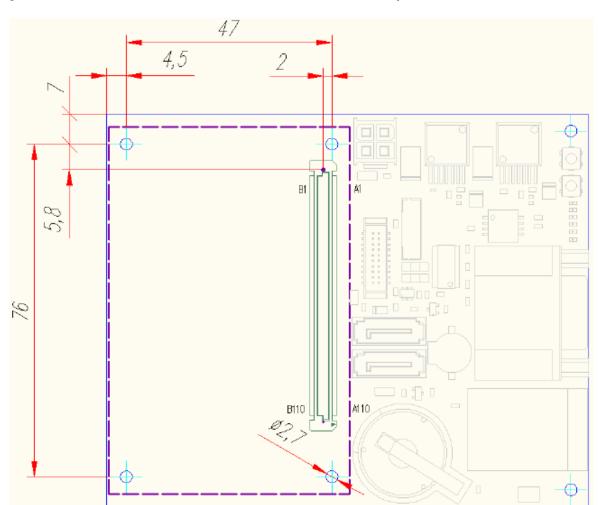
Overall dimensions of the carrier-board's installation spot
